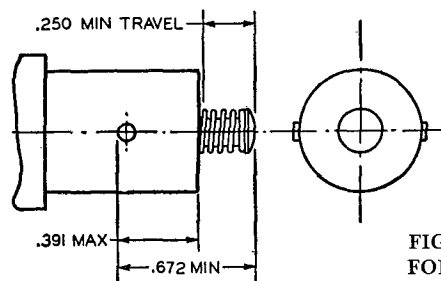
PLUG, SINGLE CONTACT FOR SHORT DOUBLE END SOCKET<sup>2</sup>
